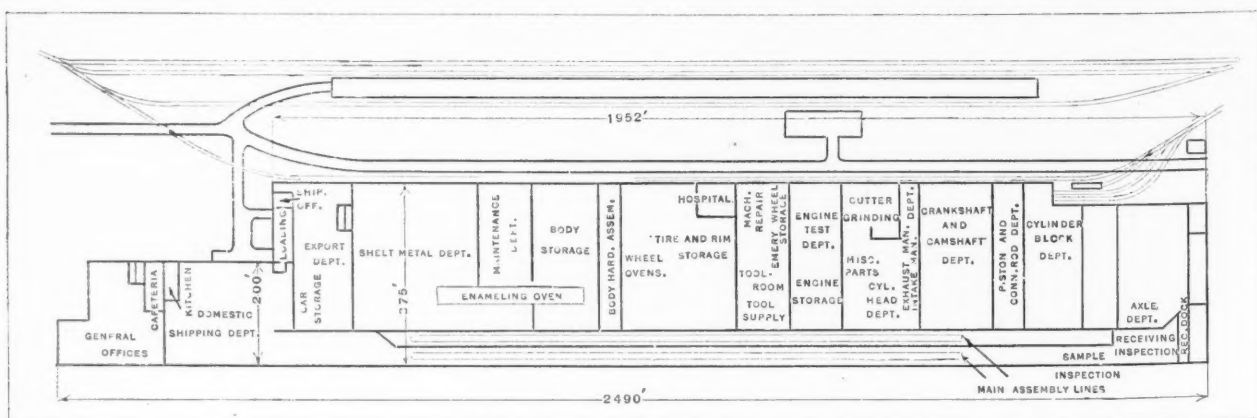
Diagrammatical Plan of the Plymouth Plant of the Chrysler Corporation
